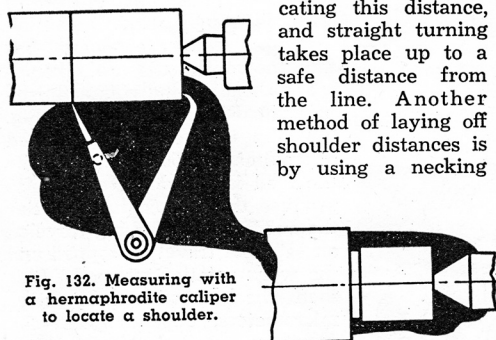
Measuring with a hermaphrodite caliper to locate a shoulder.
